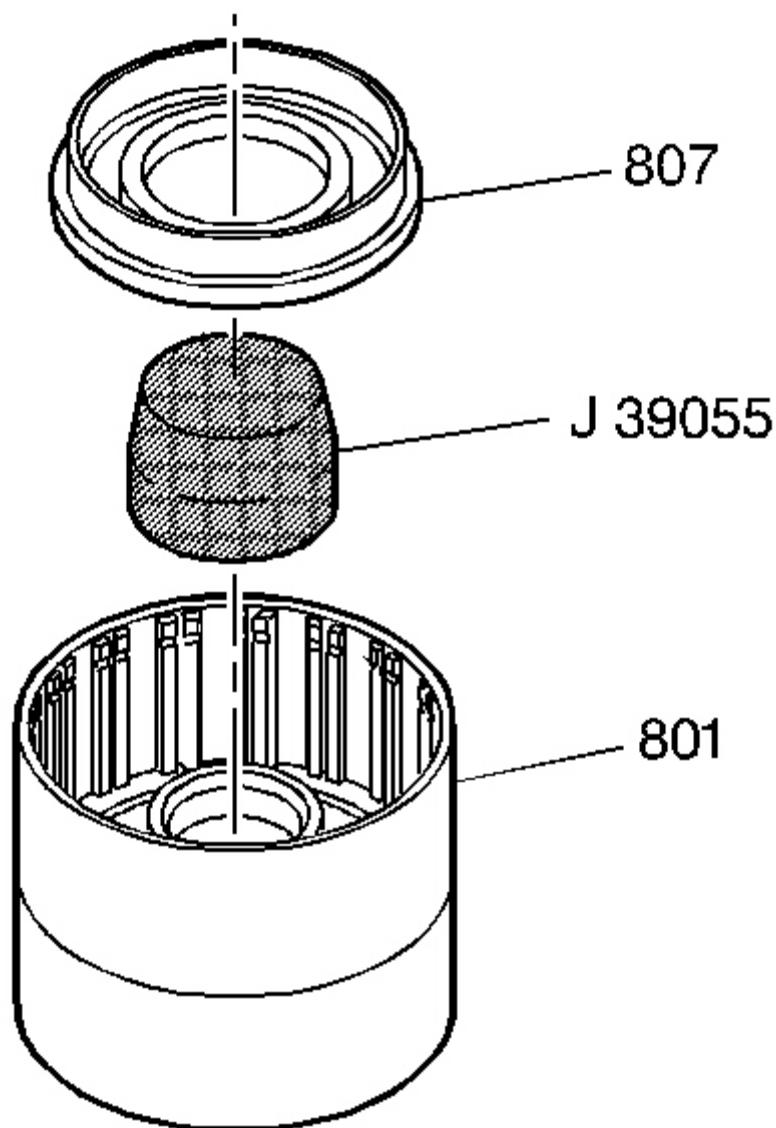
Installing The Forward Clutch Piston (807) Into The Forward And Coast Clutch Housing Using J 39055
